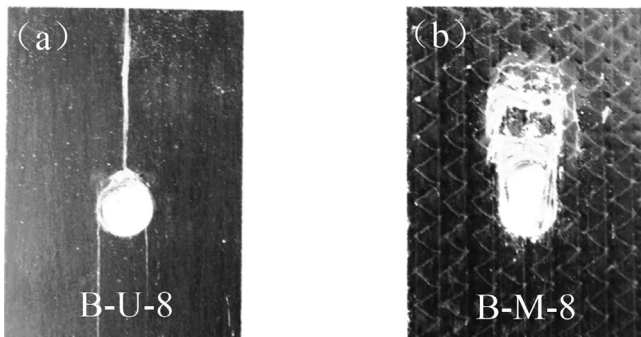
Failure modes for bolted joints with different fiber architectures: (a) UD splitting failure; (b) MD bearing failure.
